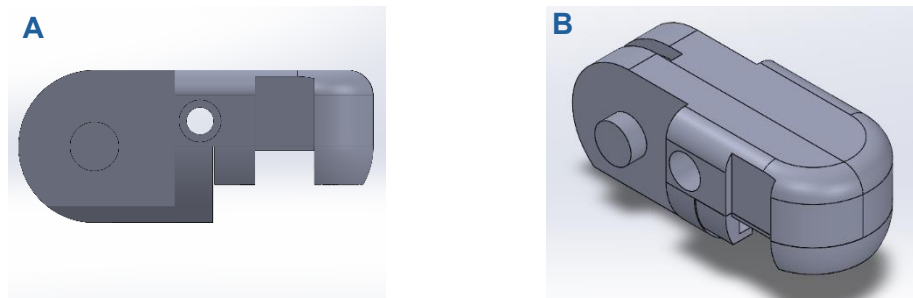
(A&B): Side and orthogonal view of final tip assembly
